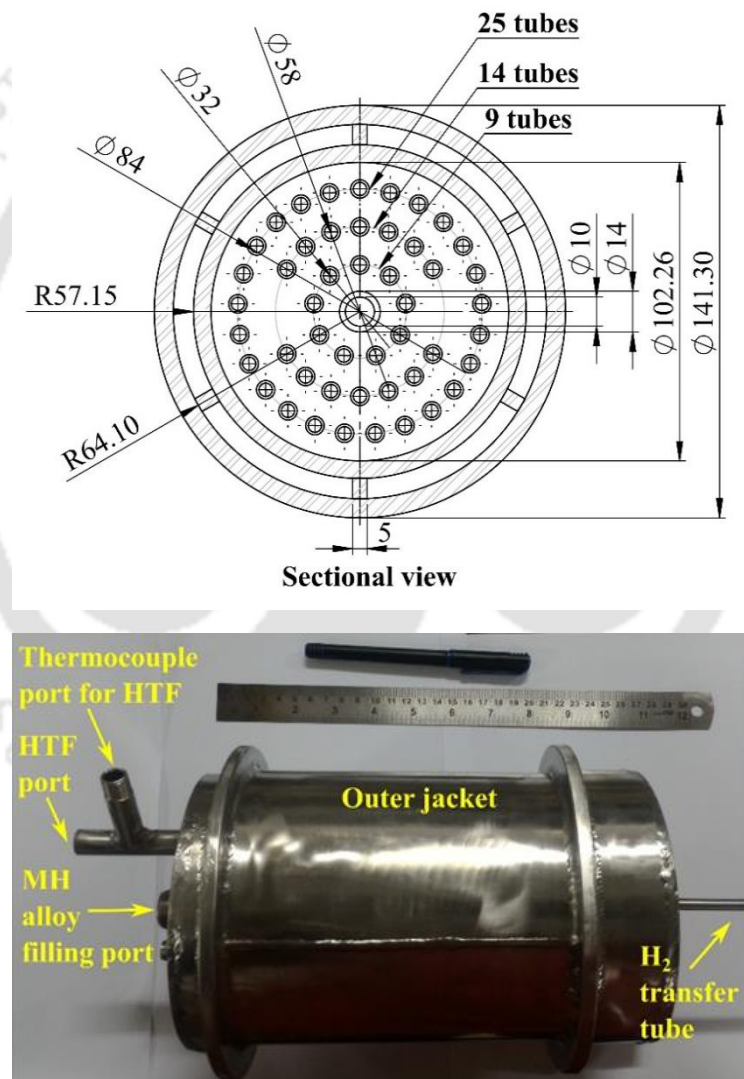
(a) 48 ECTR-OCJ model sectional view and (b) photograph of the fabricated unit.
